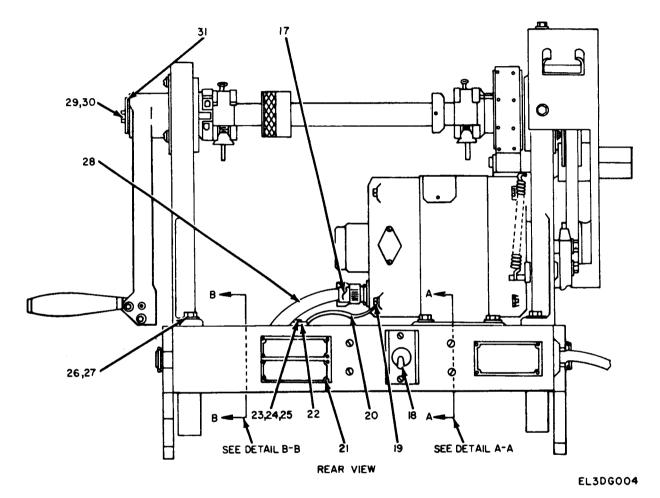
Reeling Machines, Cable, Motor Driven RL-172/G and RL-172A/G (Sheet 20f3).
